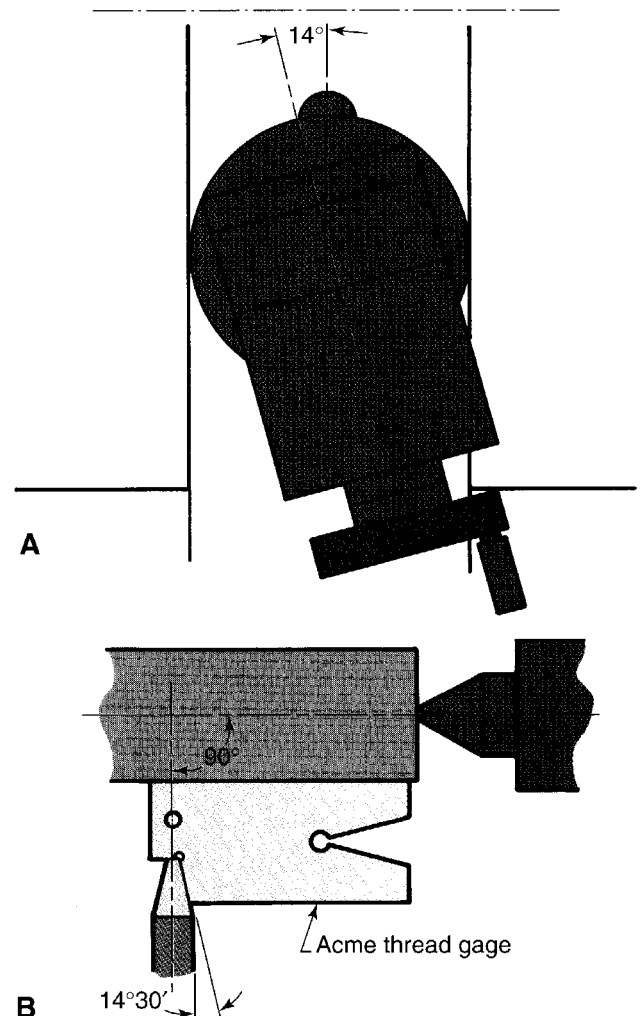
The Acme screw thread gage and tool setup gage will allow you to check lathe settings.
